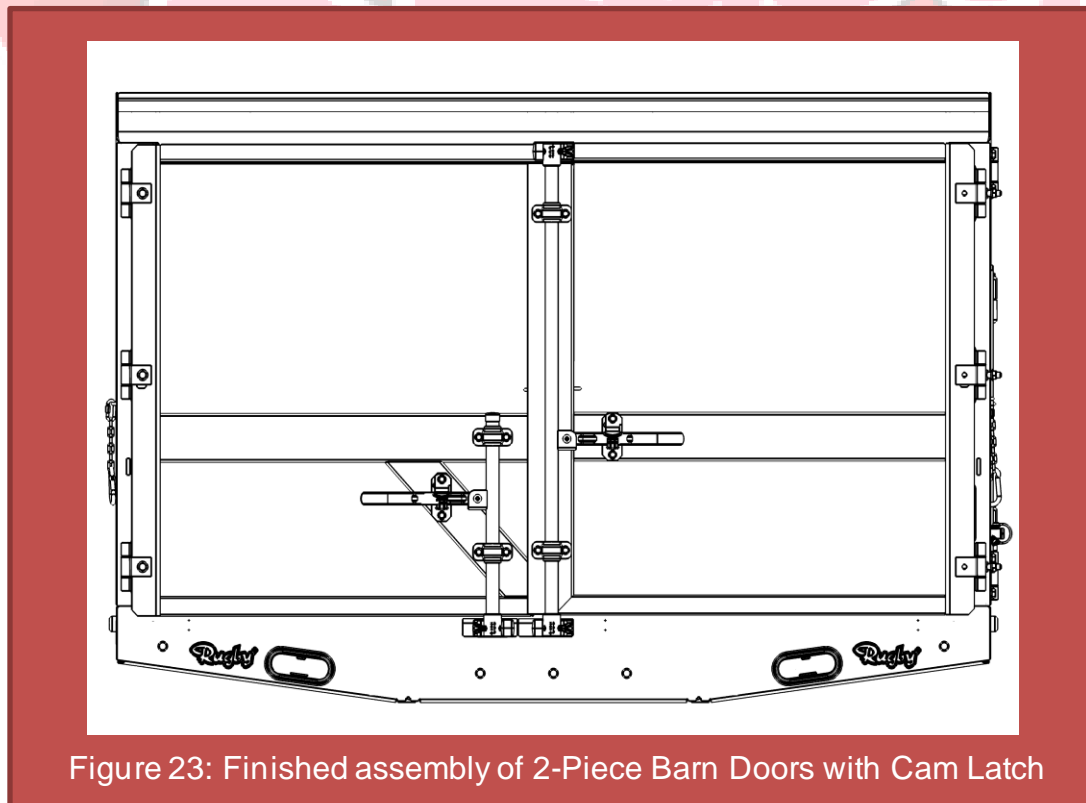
Finished assembly of 2-Piece Barn Doors with Cam Latch
